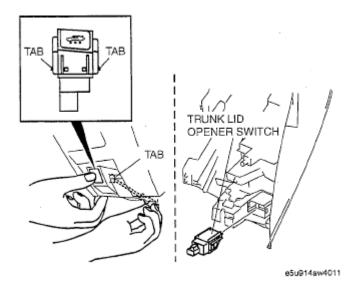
Removal/Installation View Of Trunk Lid Opener Switch Courtesy of MAZDA MOTORS CORP.
